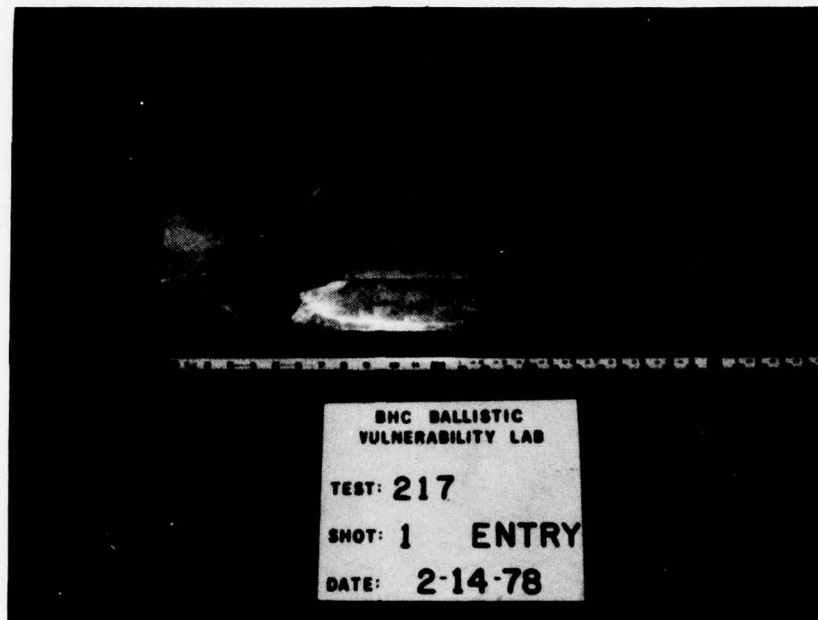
Bottom view of the OH-58C composite main rotor blade test specimen showing projectile entrance.
